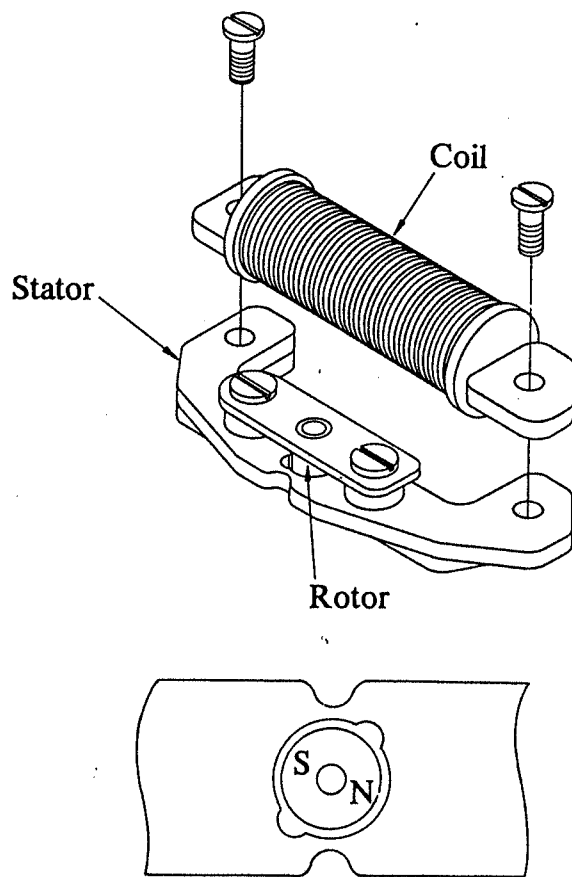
A single-phase stepping motor used in a wrist-watch.
